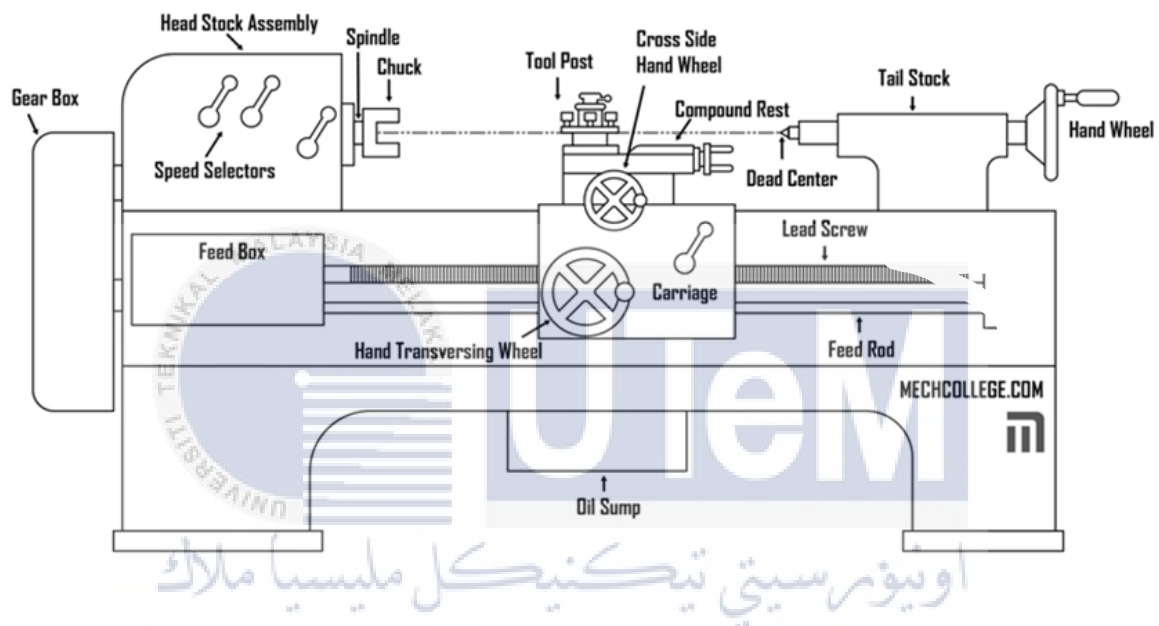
Schematic diagram of lathe machine (MechCollege, 2022)
